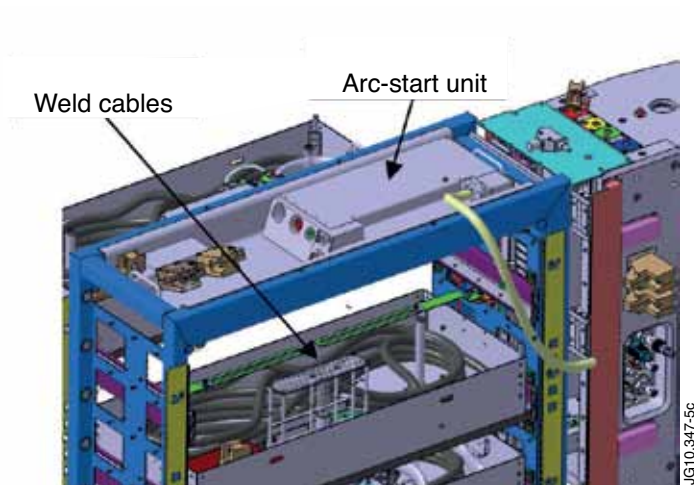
The Remote Handling Octant 1 Boom with a Task Module prepared for in-Vessel Welding.
